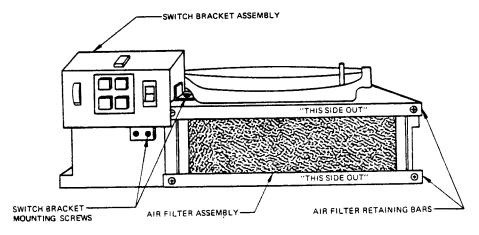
Switch Bracket and Air Filter Retaining Screw Locations
